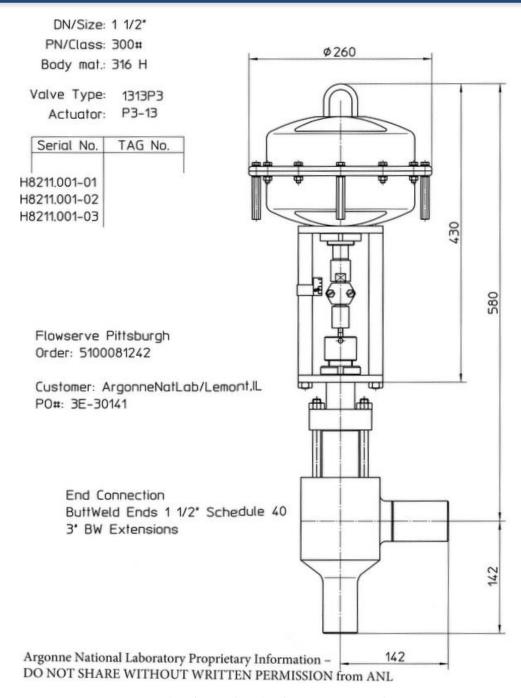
The cut sheet for the 90° Kammer valve (13).
